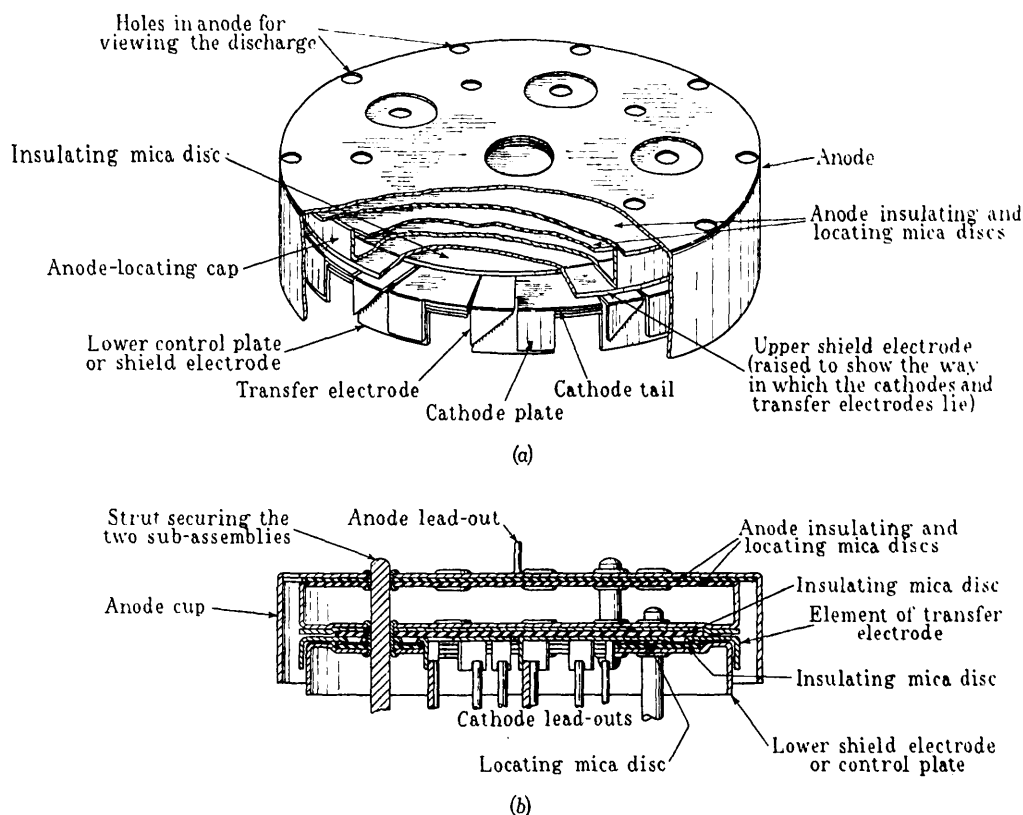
Sketch showing the electrode assembly of the G10/240E tube.
